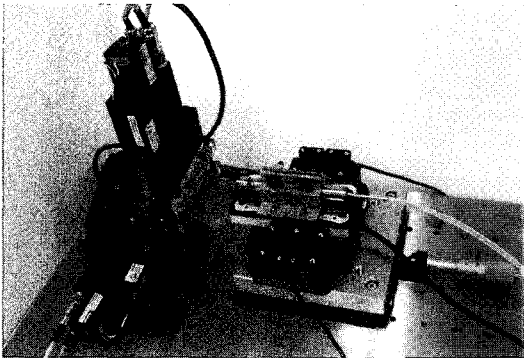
Photo of developed desktop die-sinking dry EDM machine
